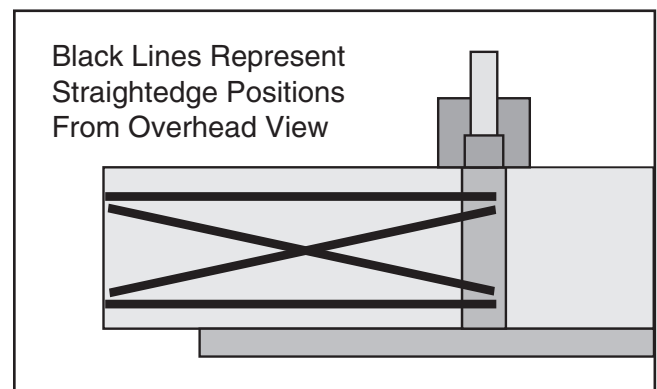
Straightedge positions for verifying if outfeed table is parallel with cutterhead.
